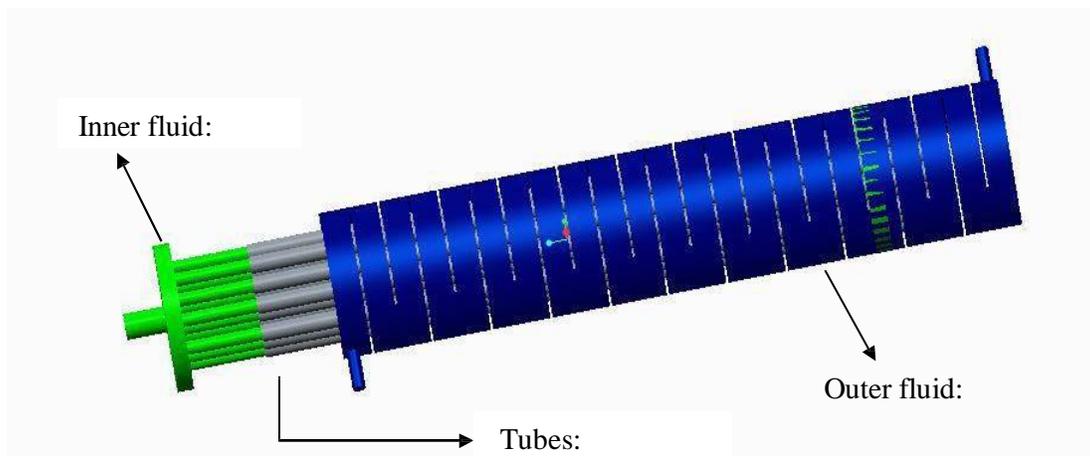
Fluid assembly model of the shell and tube heat exchanger
